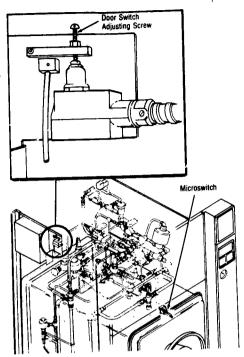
DOOR SWITCH ADJUSTMENT.
